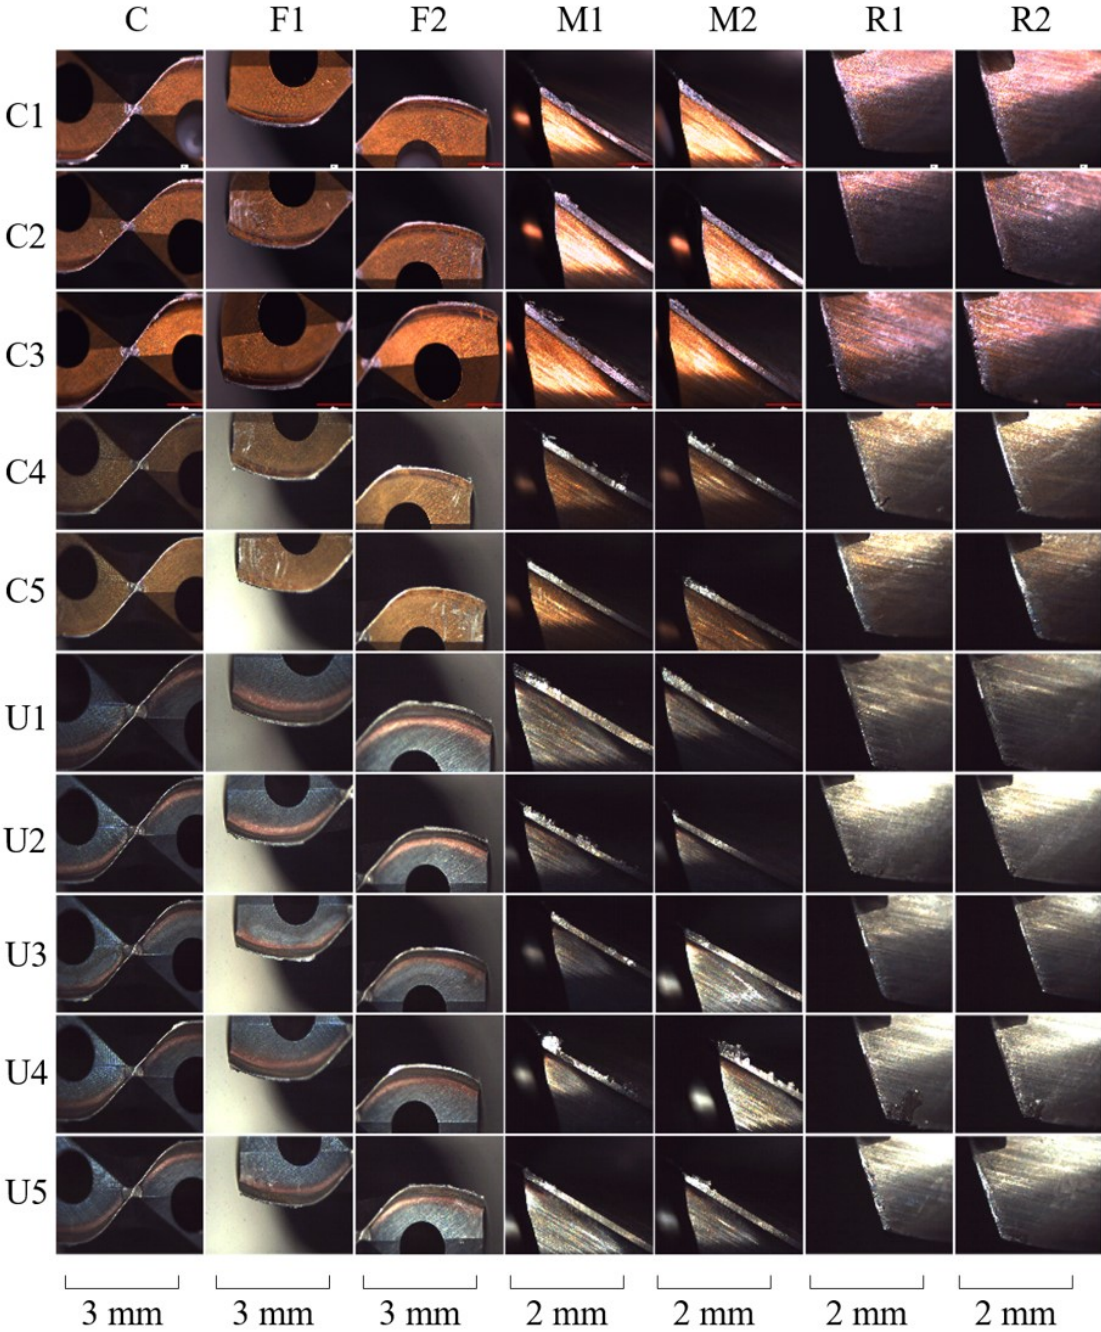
Photographs showing the chisel (C), both flanks (F1, F2), both margins (M1,M2) and both rake faces (R1, R2) for each tool (C1 –C5, U1 – U5), used in experiment 2 after 227 holes.
